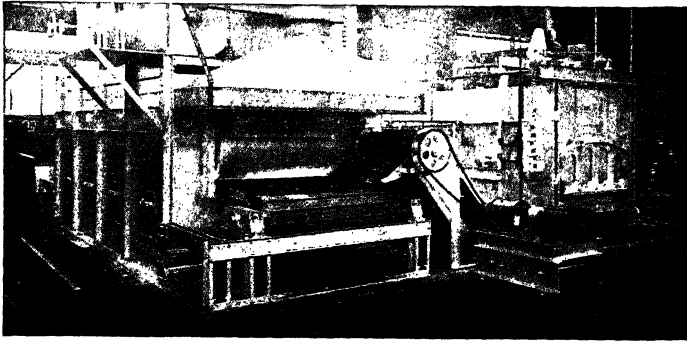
Conveyor quench tank used with chain-belt hardening furnace (right background) and chain-type draw furnace (foreground), for heat-treating tractor parts.
